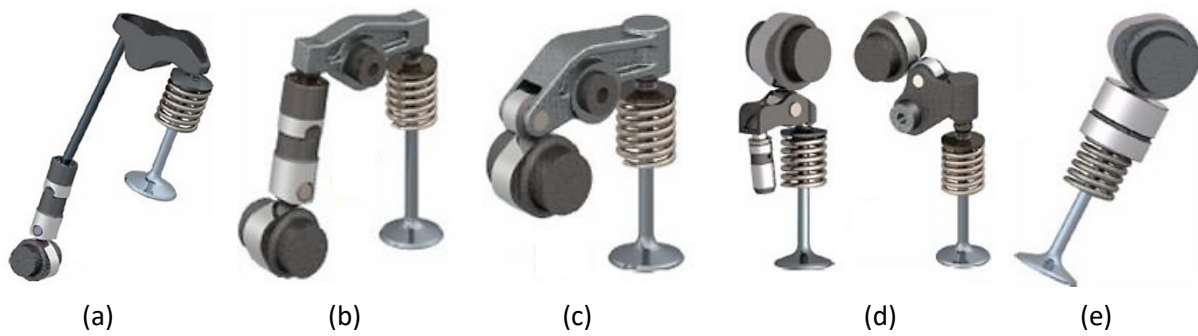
Different valve train mechanisms. cylinder block camshaft (a), center pivot OHC with follower (b), center pivot OHC (c), end pivot OHC (d), direct acting OHC (e). Adapted from [25].
